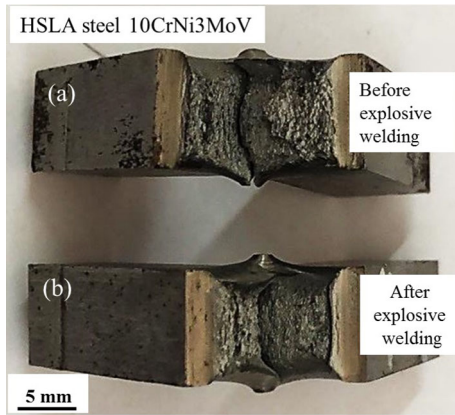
Charpy impact tests specimens of HSLA steel 10CrNi3MoV after tests at $-20\text{ }^{\circ}\text{C}$: (a) the base material before explosive welding and (b) after explosive welding
